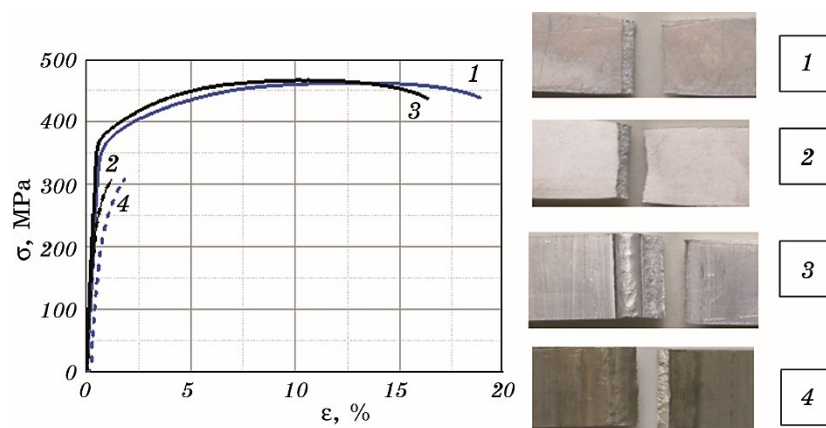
Breaking diagrams (*a*) and the view of the fracture area of specimens (*b*) of base metal (1, 3) and welded joint (2, 4) of AA2219-T81 alloy as-received (1), as-welded (2) and after tests in amyl (3, 4).
